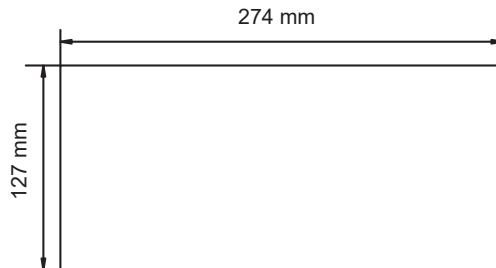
Wall-mounted Module Installation Dimensions\_ Front View )
